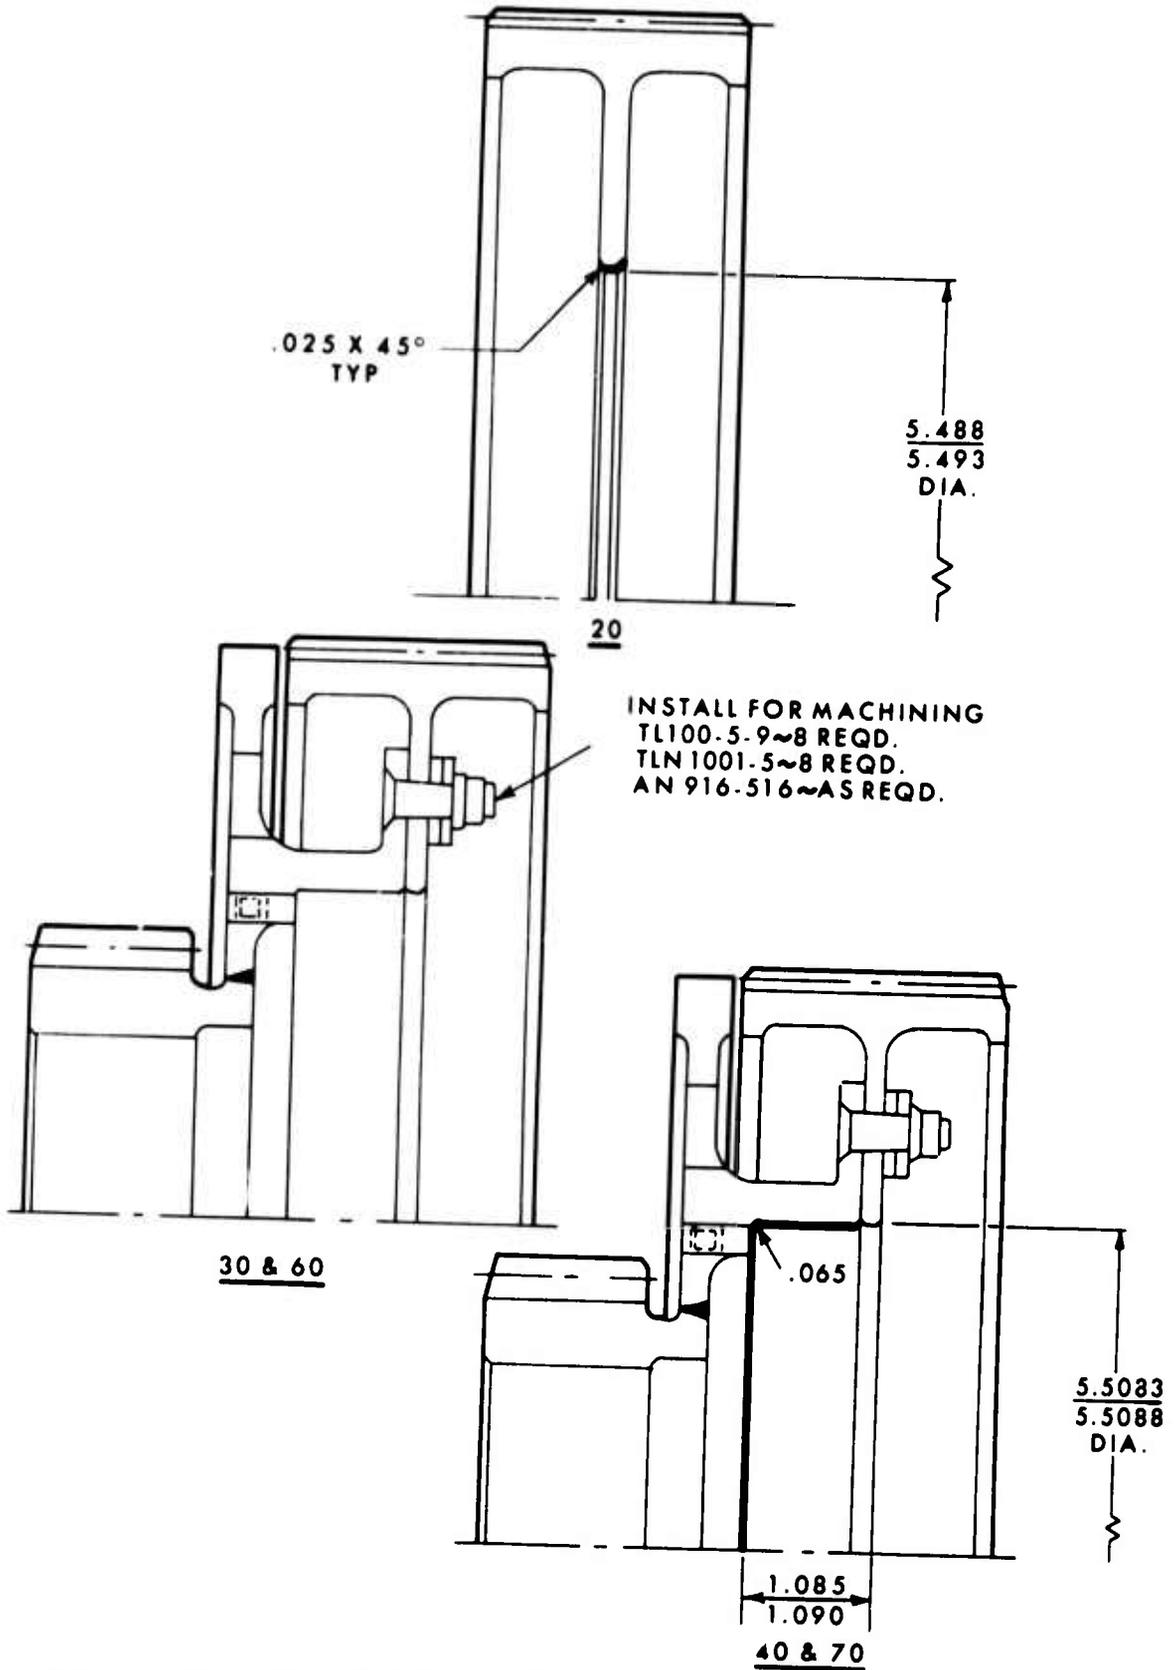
, RG351-11278-041: Machine Operation Drawing.
